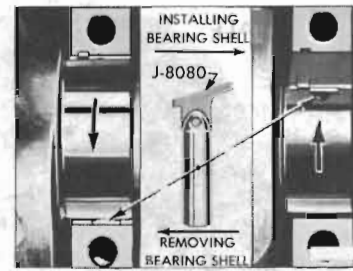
Removing and Installing Crankshaft Bearing Upper Shell
